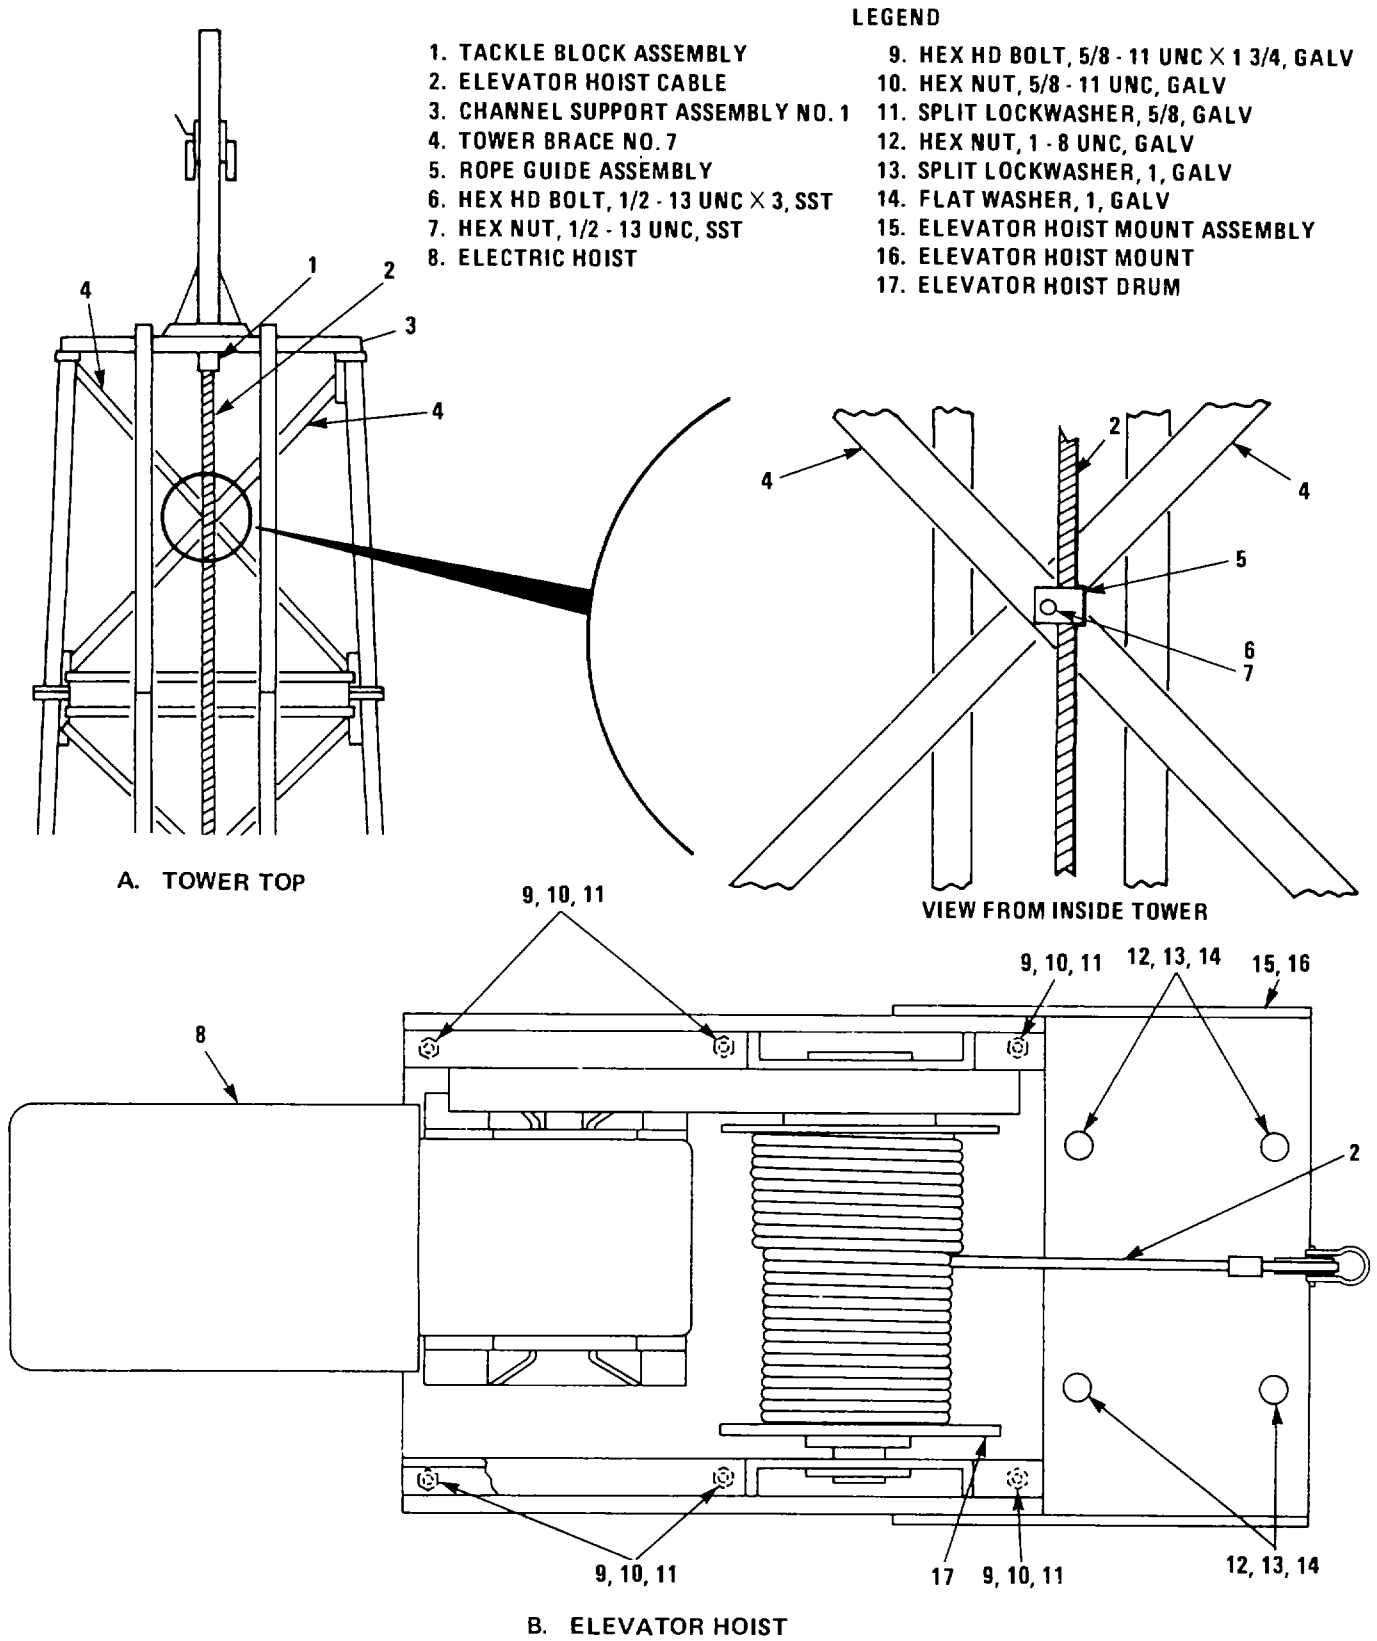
Elevator Hoist, Cable, and Rope Guide Assembly
